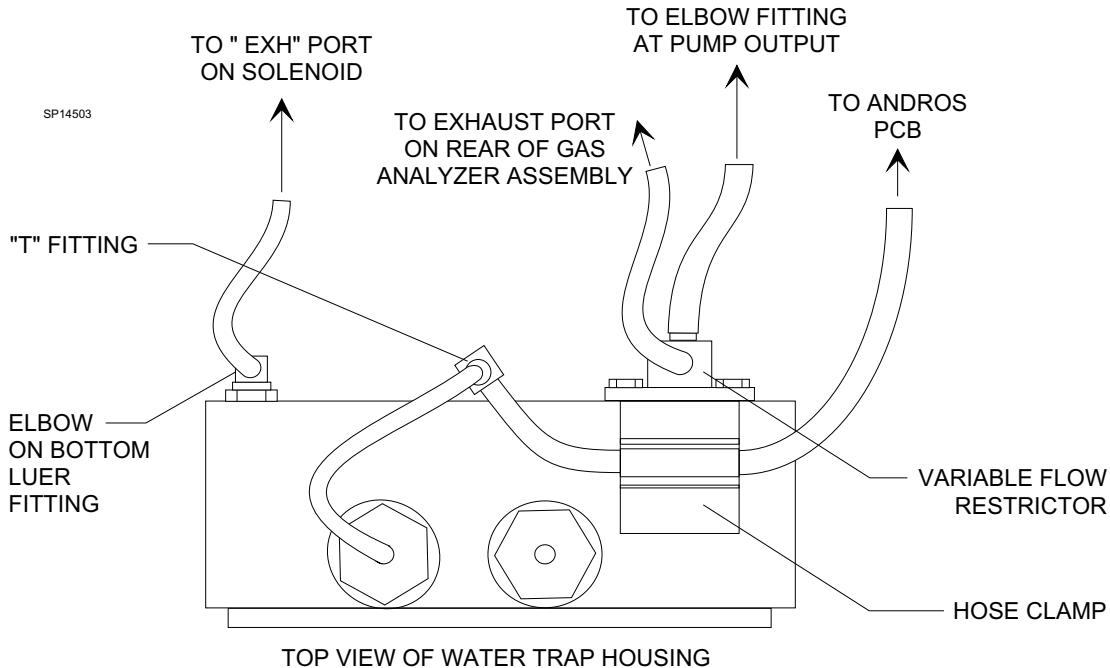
REPLACEMENT WATER TRAP HOUSING CONNECTIONS
